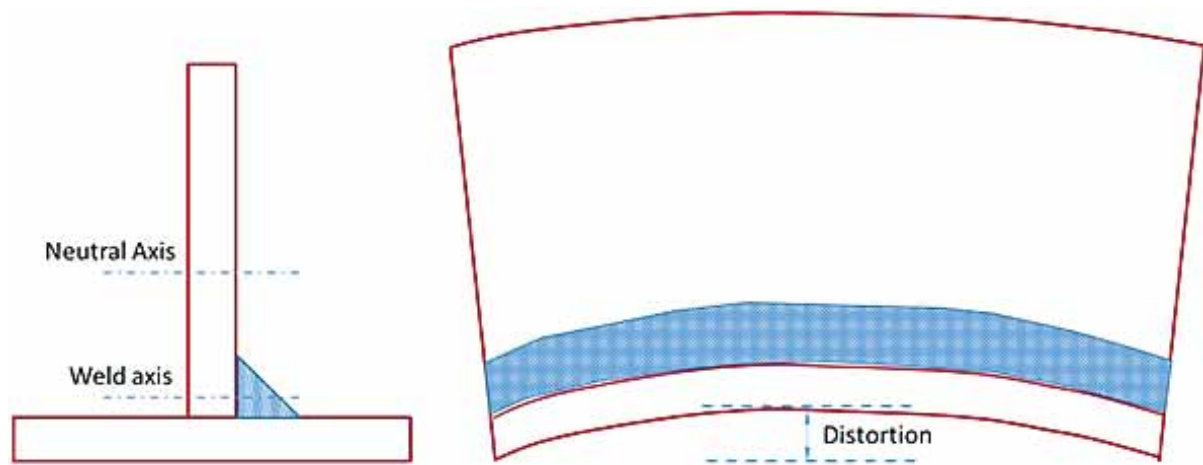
(c) – Distorted shape of T joint after welding due to weld shrinkage
